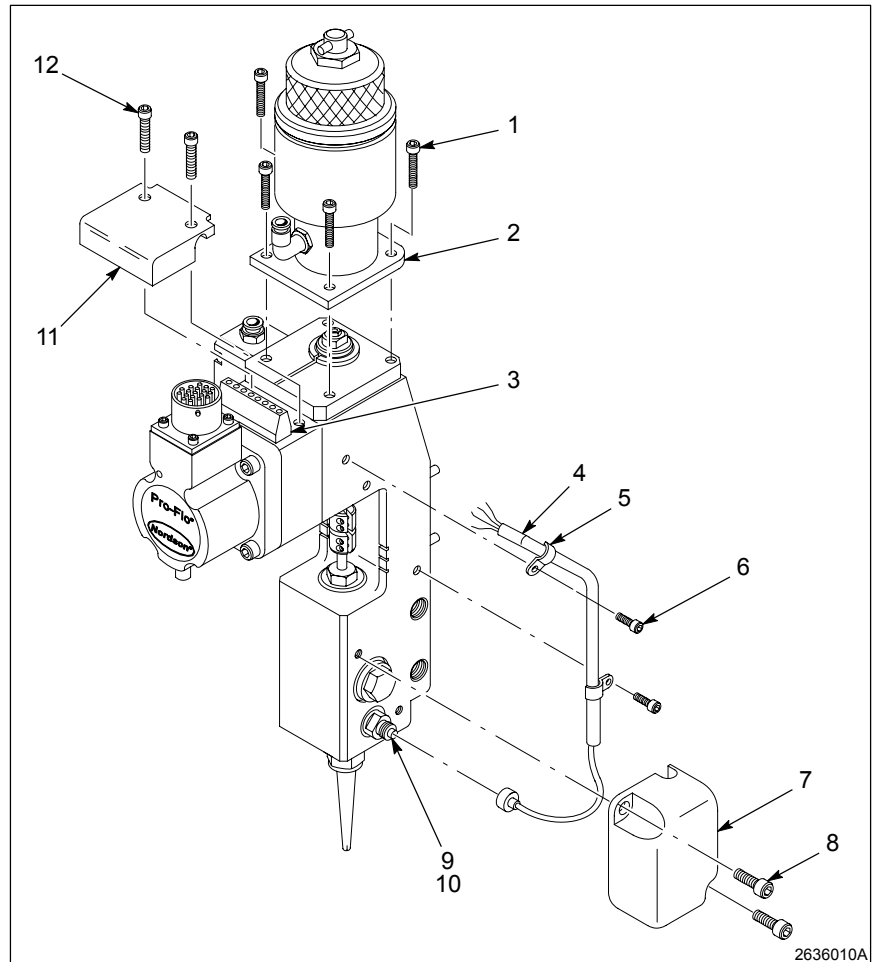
Replace or Change the Pressure Transducer Cordset (Right-Hand Version Shown)
